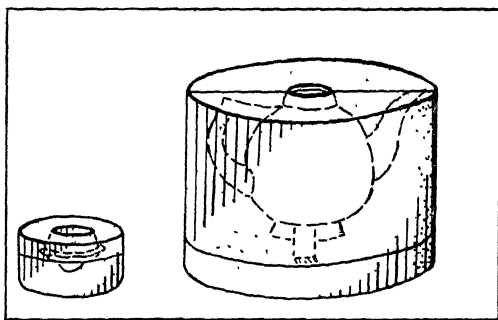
A teapot with a handle and spout is hard to cast, but it is worth while trying. Before casting, plug up the spout part of the mold until the body is thick enough. Then remove the plug and cast the spout. The cover mold is shown at the left.
